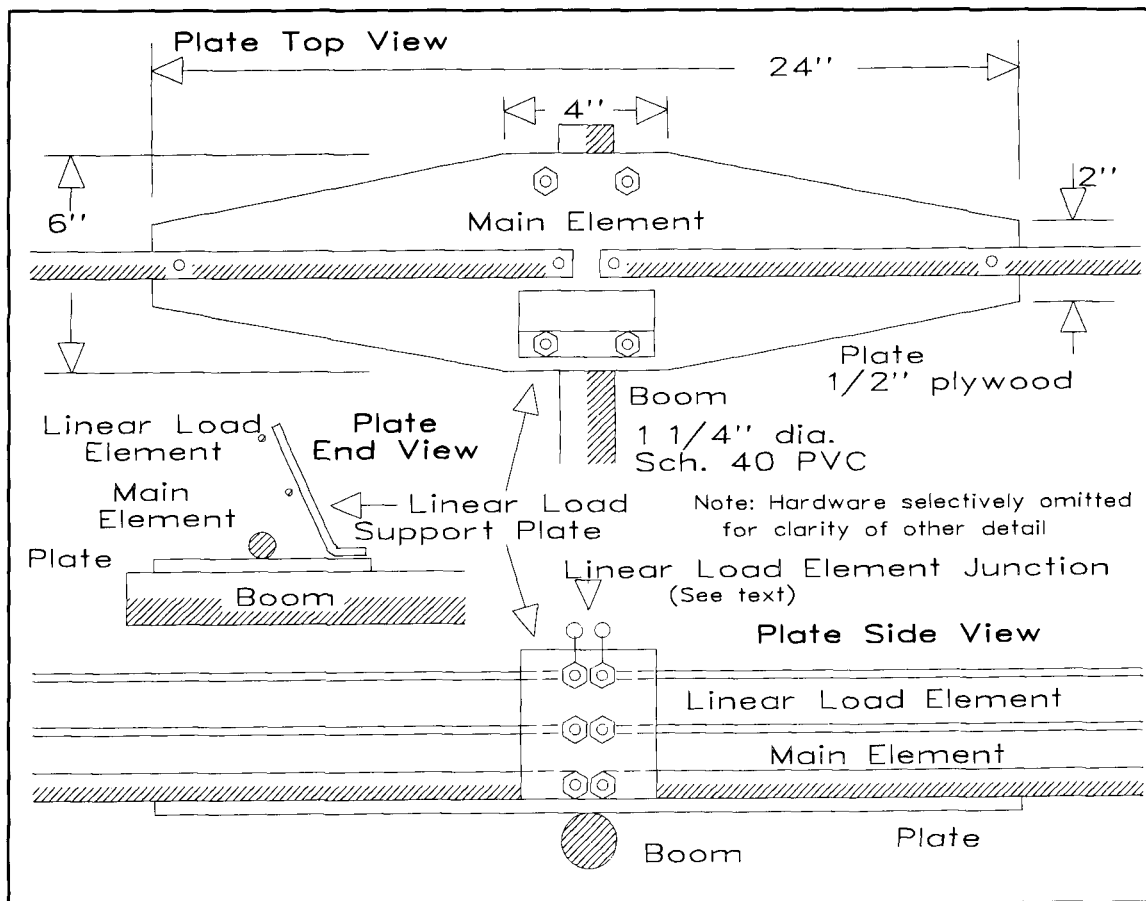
The basic element-to-boom assembly of the test 2-element linear-loaded Yagi with details of the linear load support plate at the main element center point.
